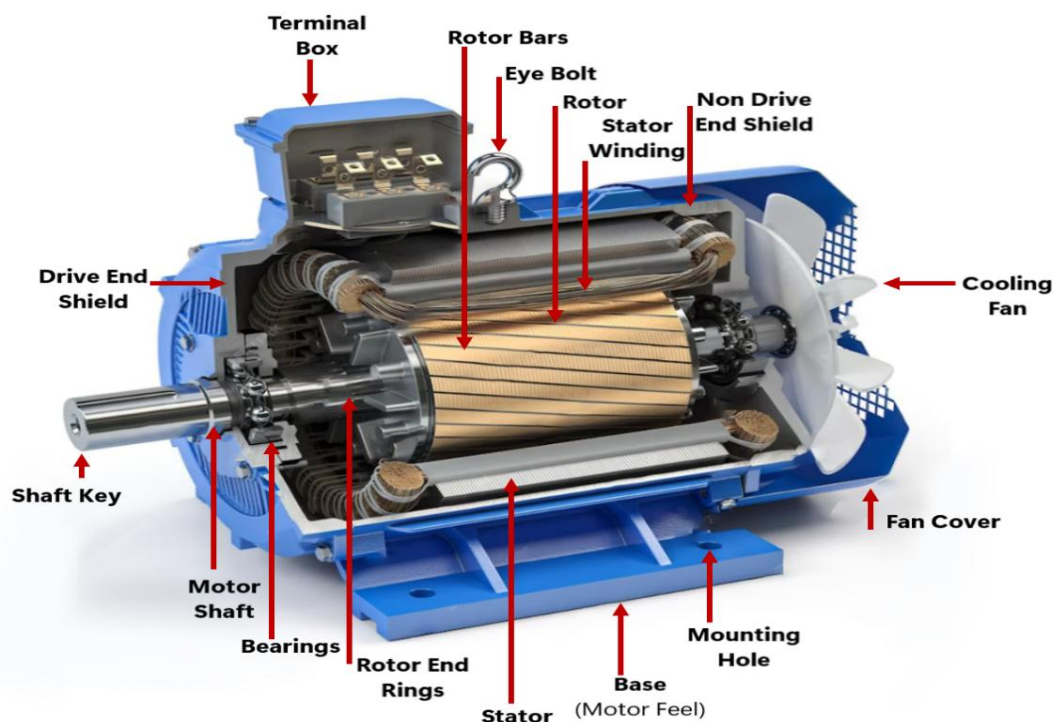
Components of an induction squirrel-cage motor (Cross section).
